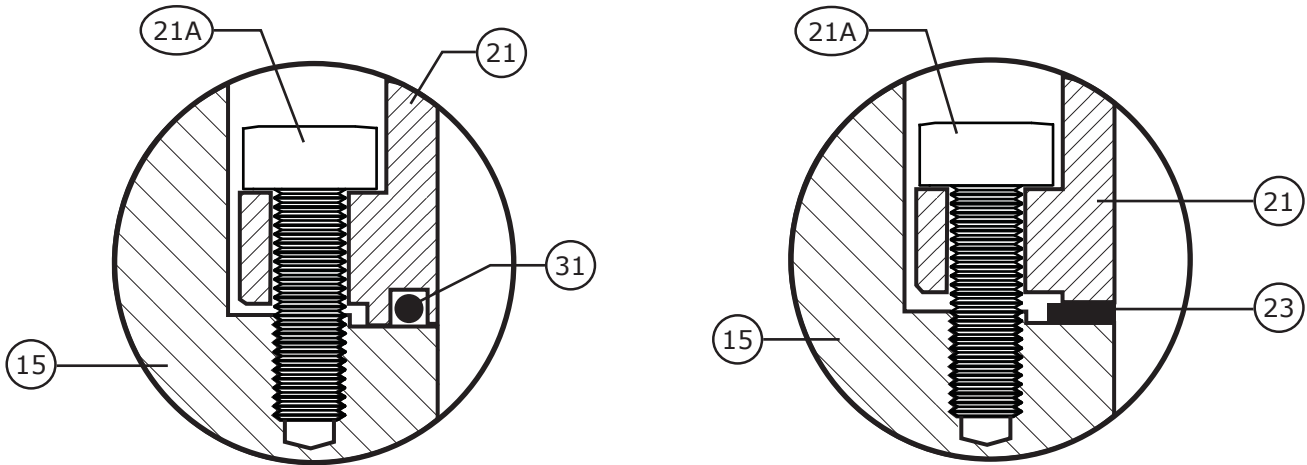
Detail B - O-Ring and Gasket Seat Ring Seal
